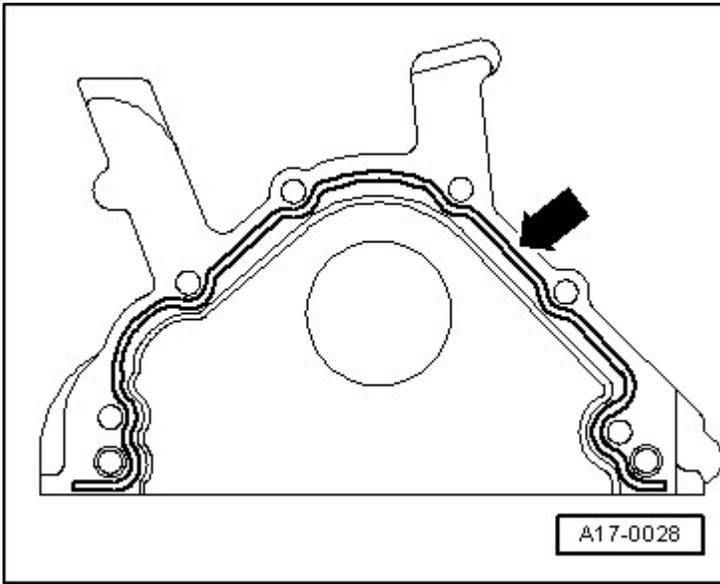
Applying Silicone Sealant Bead To Clean Sealing Surface Of Sealing Flange
